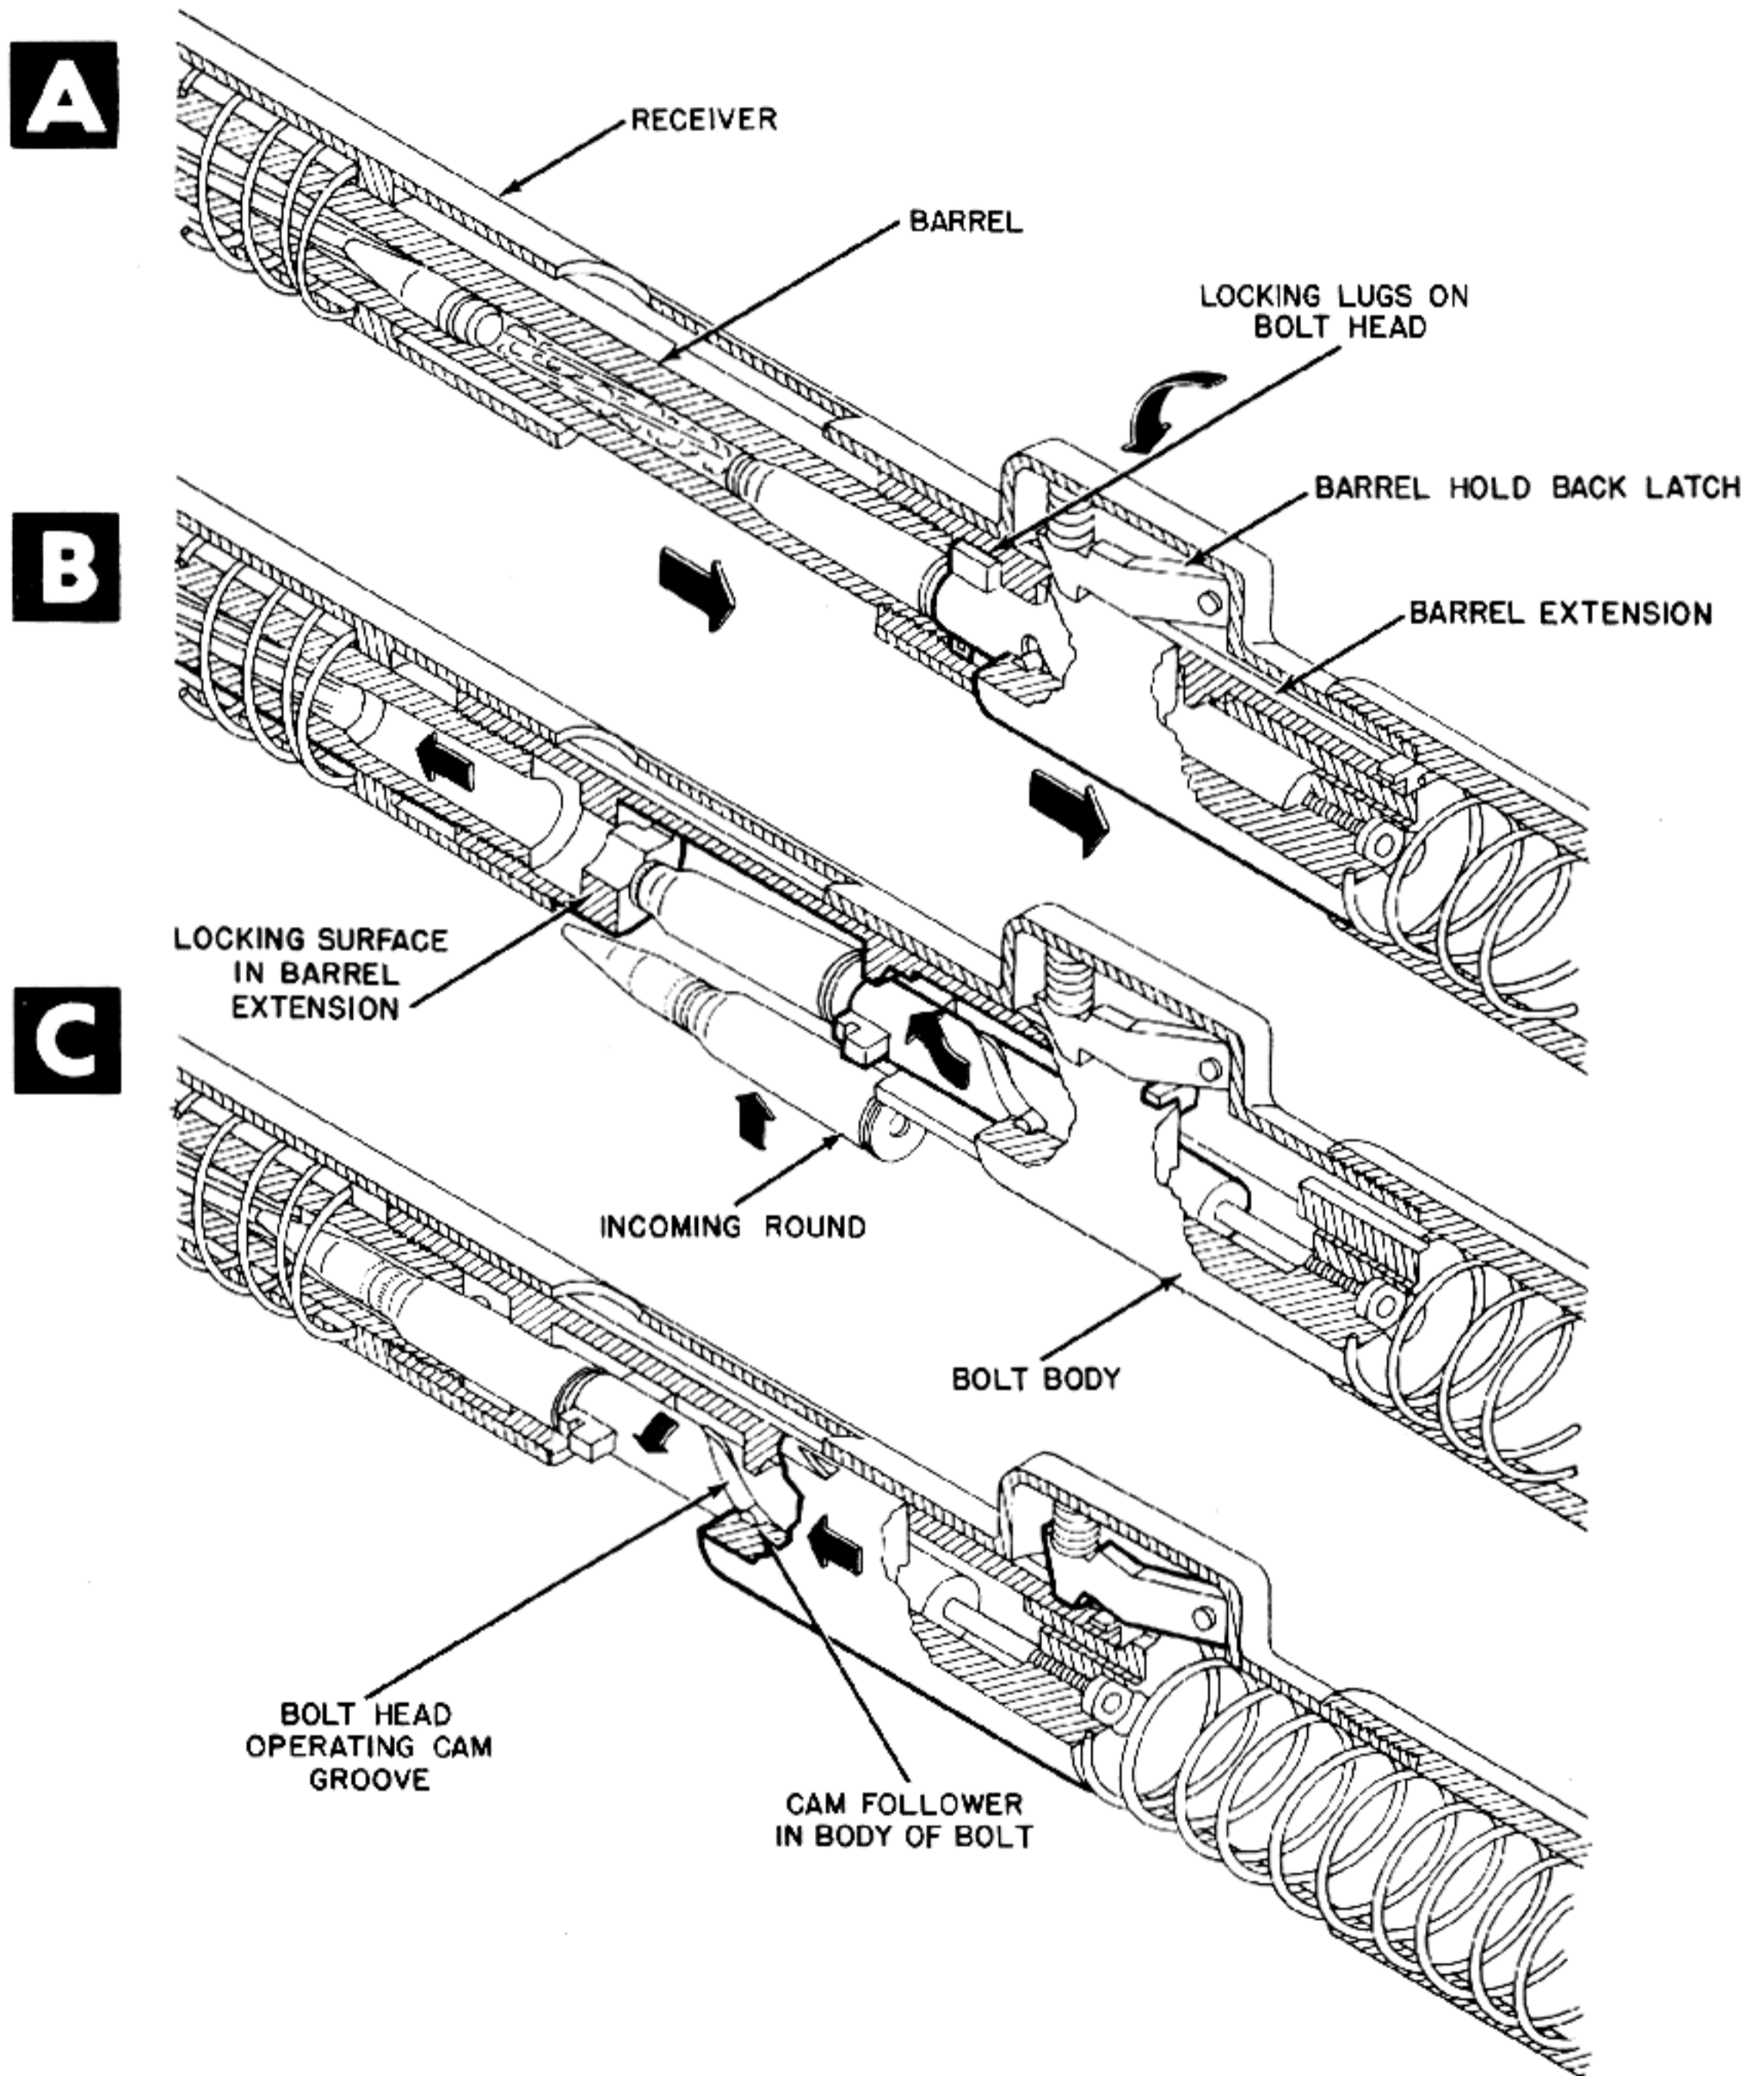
Solid Bolt Is Unlocked by the Counter-Recoiling Barrel Extension.
